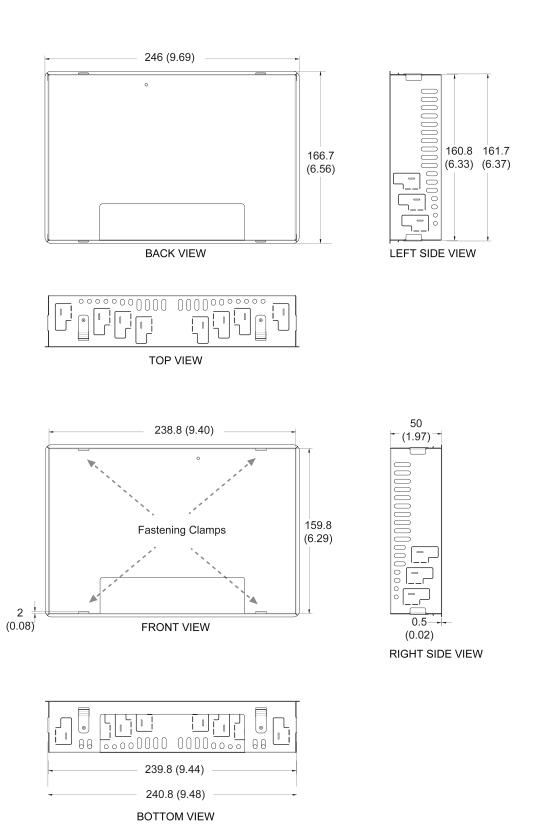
HORYZON-C10 Wall Mounting Kit dimensions
